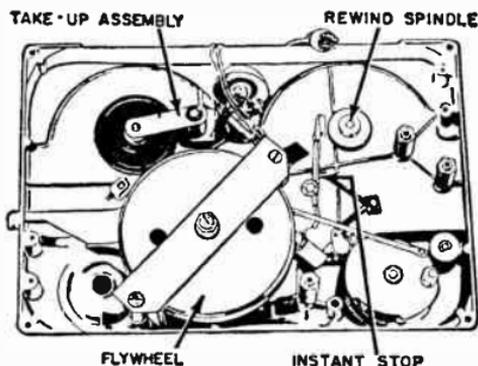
Illustrating typical method of using a flywheel for driving the take-up reel of a tape recorder. The flywheel is coupled to the motor through an idler pulley.
